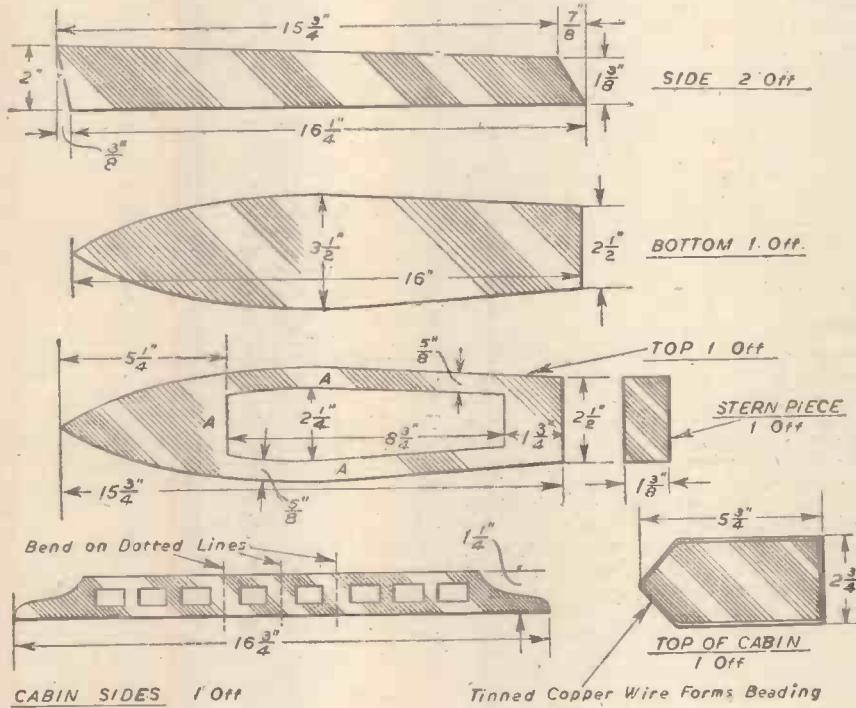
Showing how to mark out the blanks for forming the hull and superstructure.
